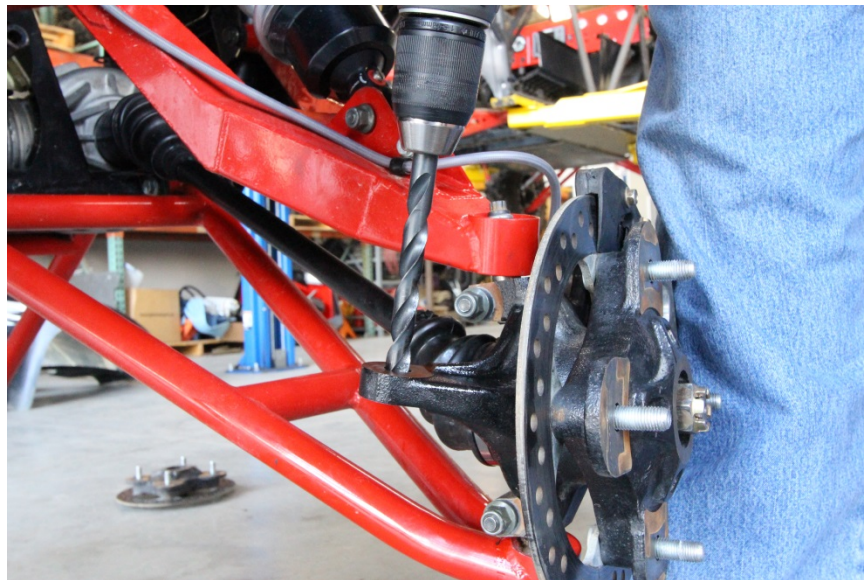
Drill the tie rod hole in the spindle, out to 1/2"
